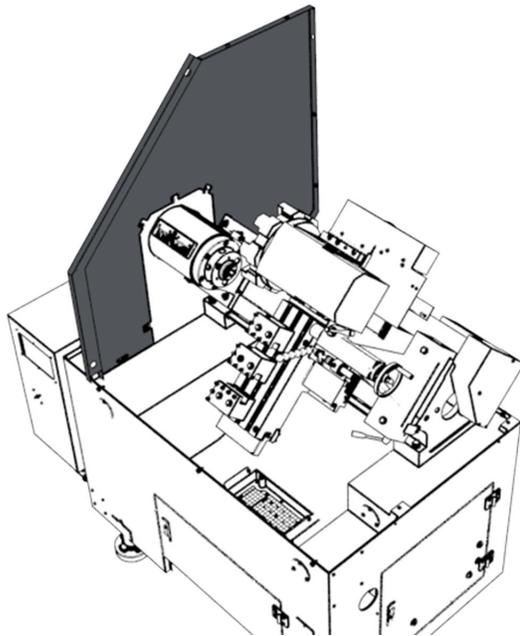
Left side panel installed between the mounting plate and the sheet metal guard.
